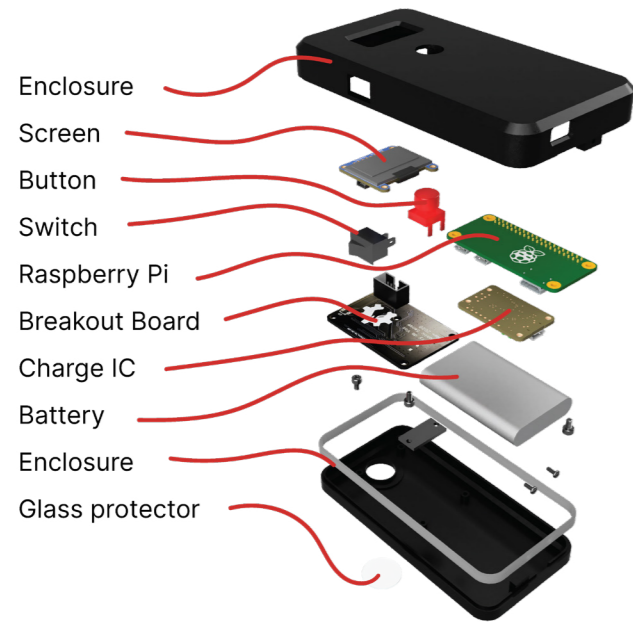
Exploded view of all components that make up the handheld scanner.
